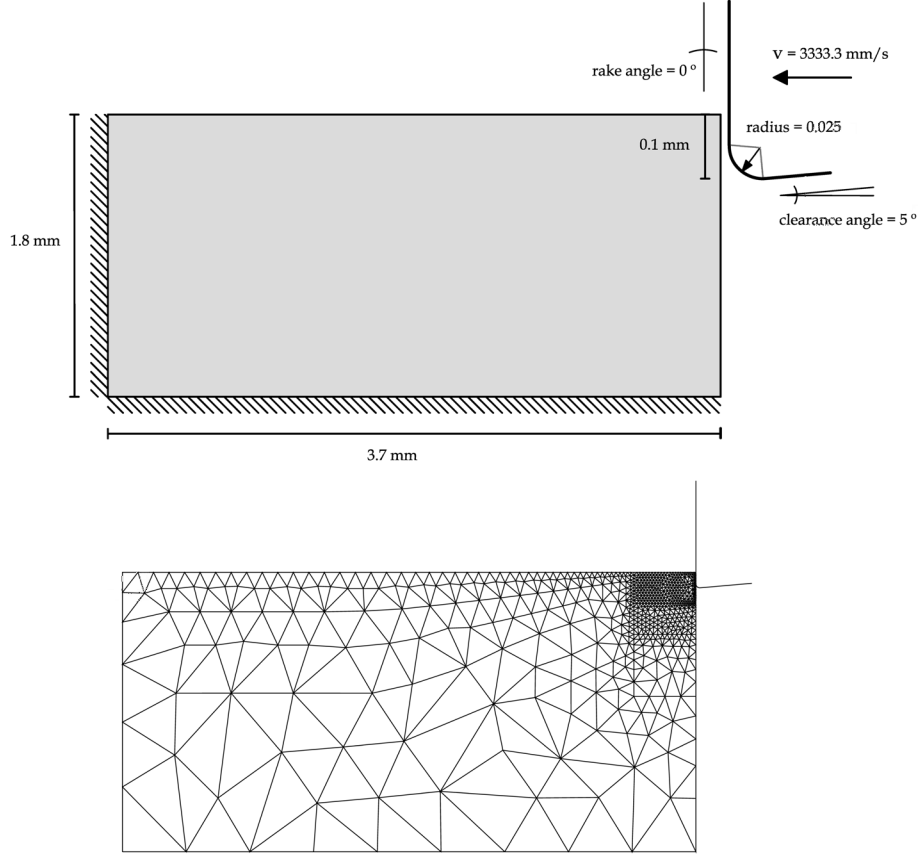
Steel cutting test. Workpiece, tool dimensions and initial unstructured triangular mesh.
